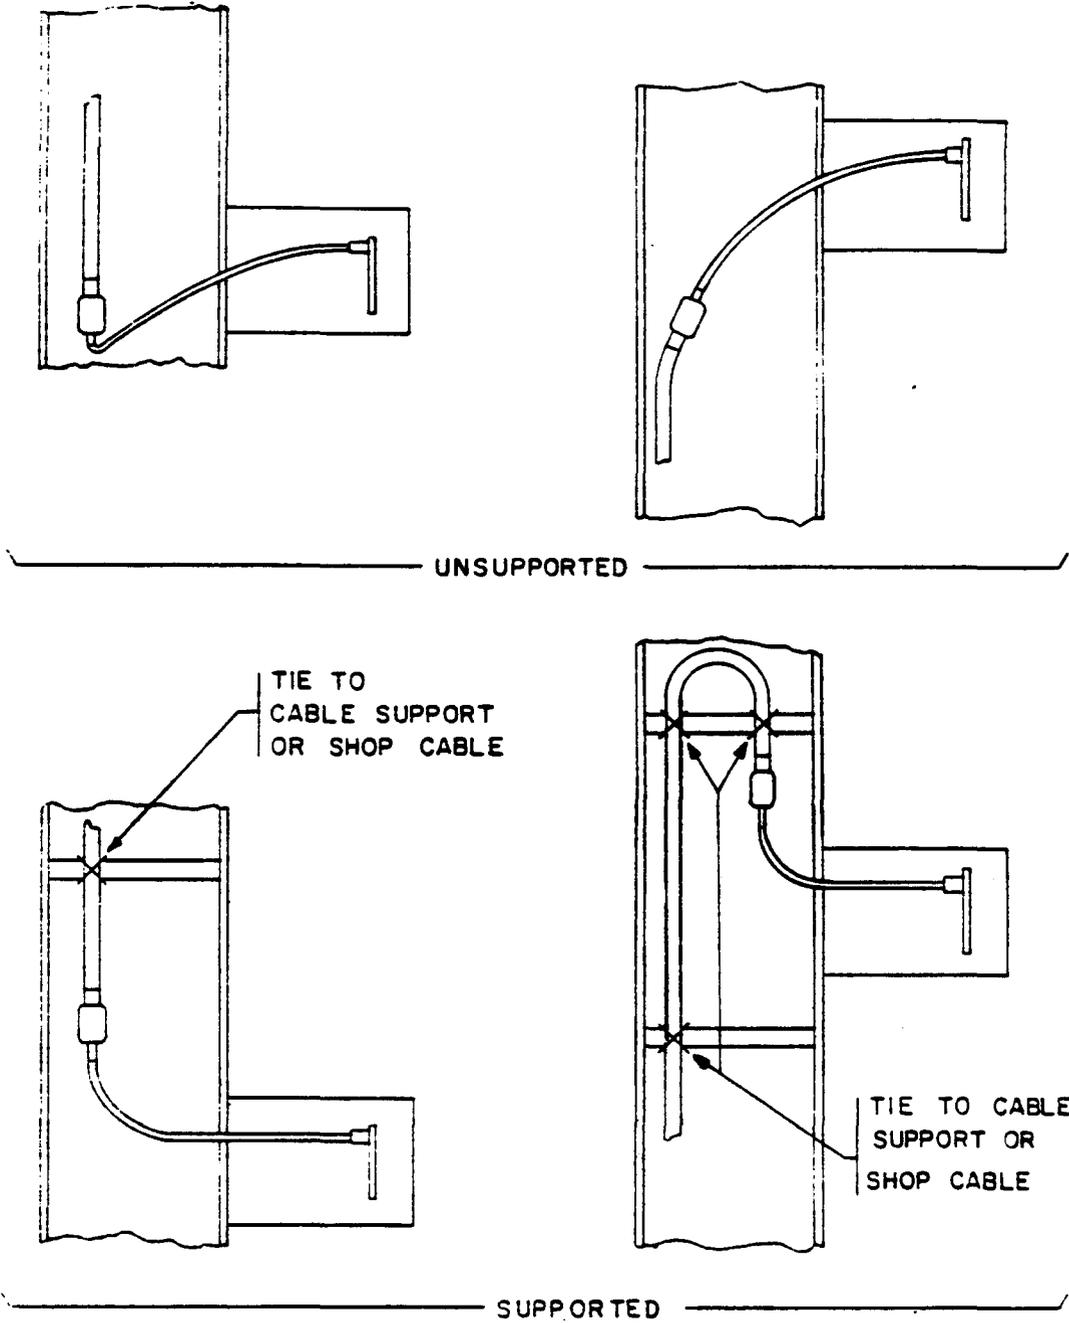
EXAMPLES OF SUPPORTING MINI-CABLE.
